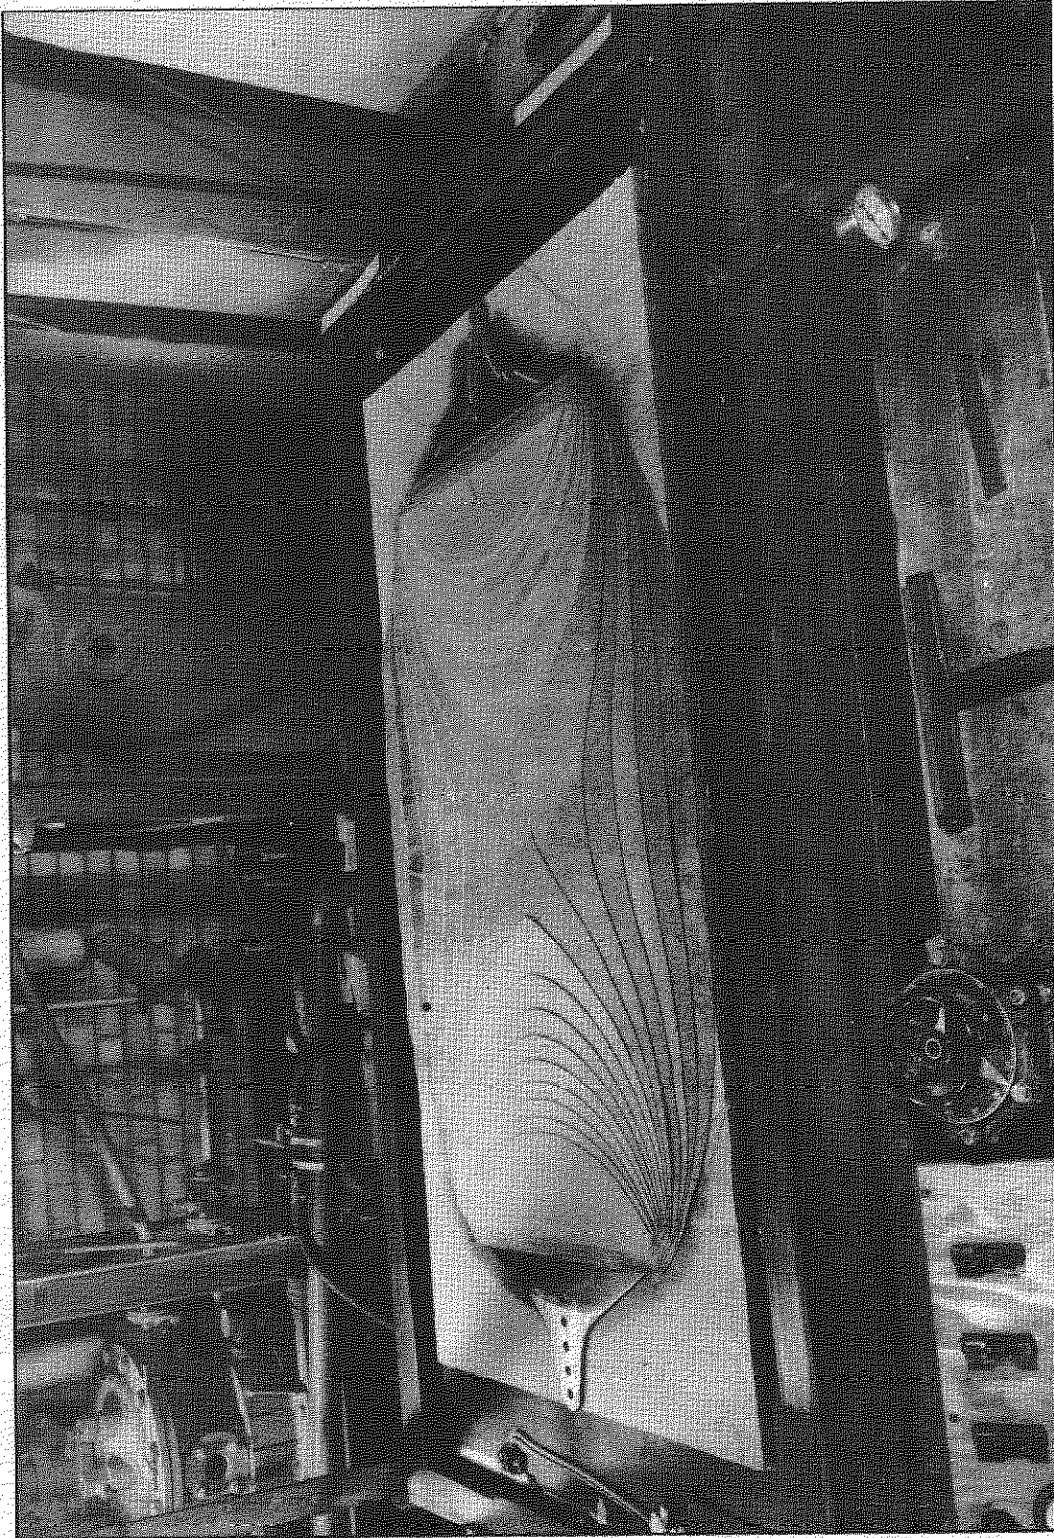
CONTOURED FELT ASSEMBLY COMPLETED
